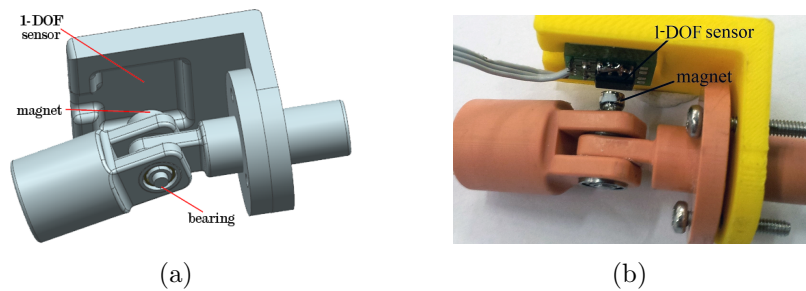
Revolute joint (a) CAD and (b) 3D printed part
